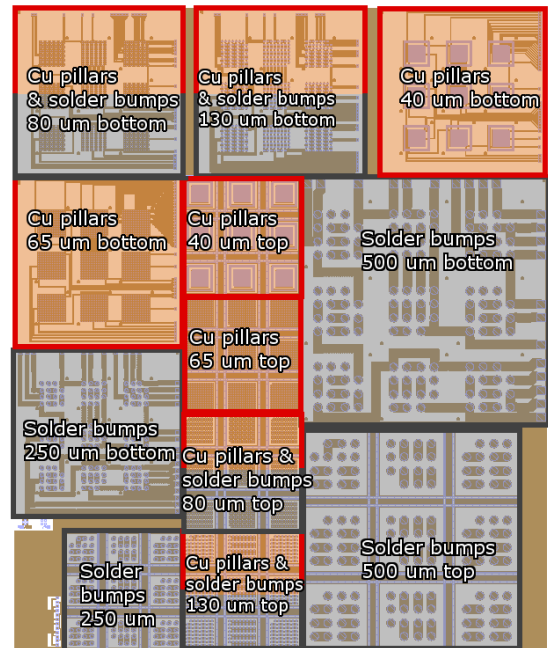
Test vehicle layout developed on purpose (top and bottom dies)
